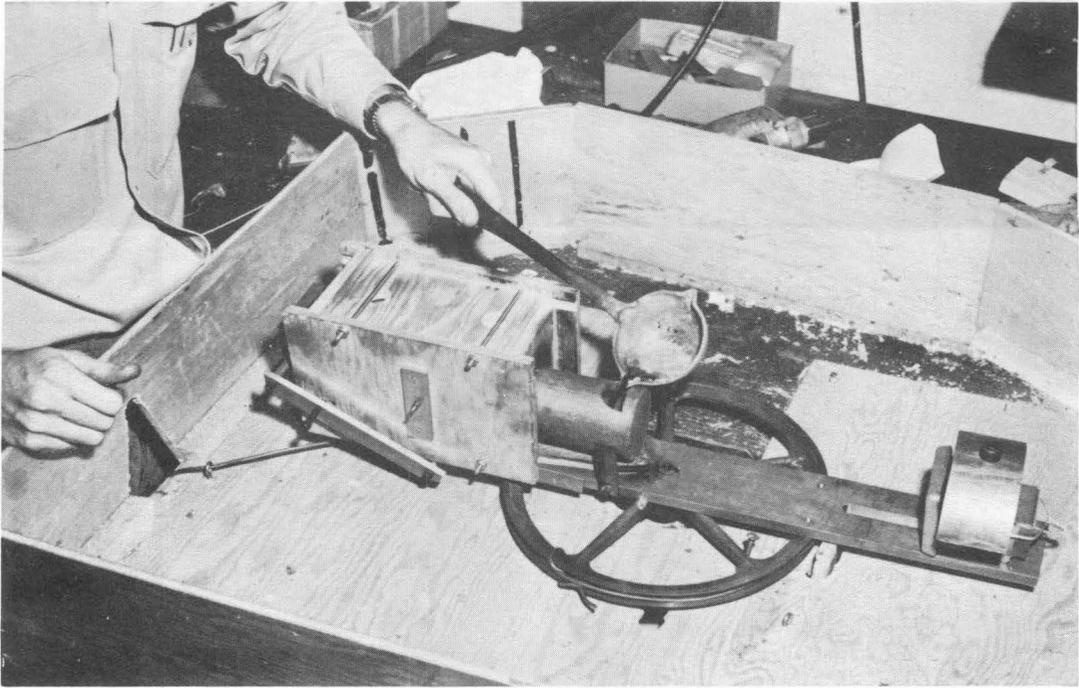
Centrifugal casting setup showing metal being poured into crucible before centrifuging into warmed mold.
